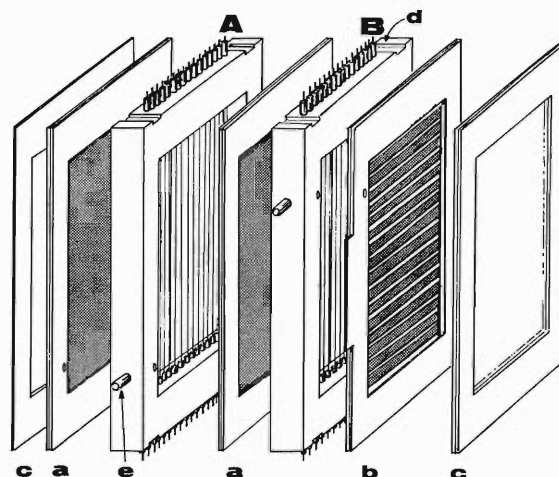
Exploded view of MWDC assembly. A and B, wire frames; a, cathode frames; b, cathode strips; c, Mylar frames; d, alignment slots; e, gas inlet, outlet.
